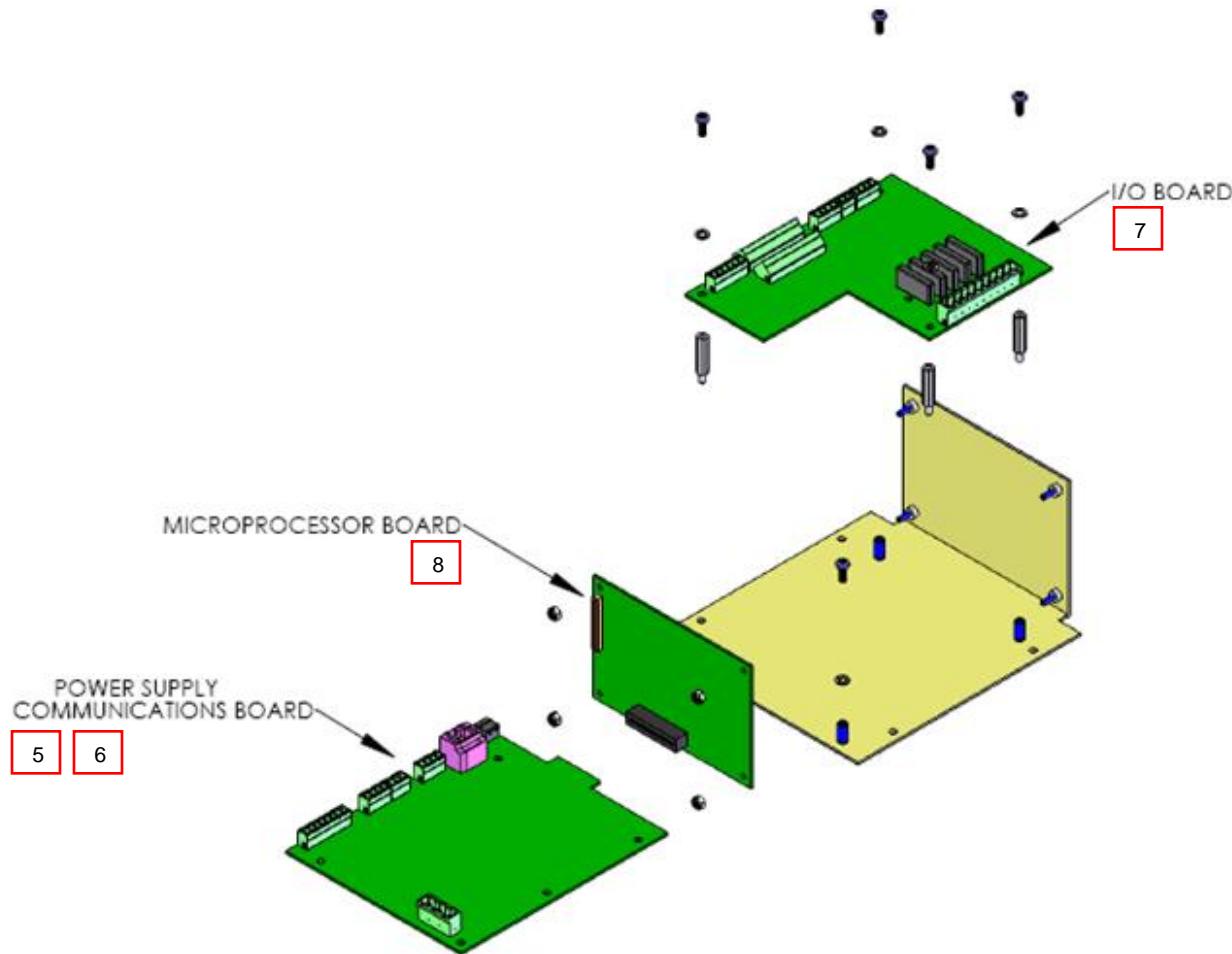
Power Supply / Comm Board & I/O Board Chassis
